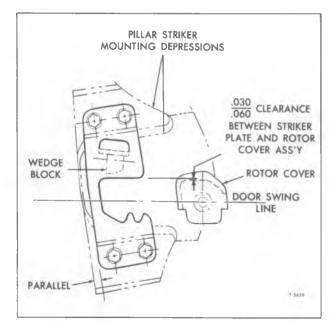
Lock Rotor Cover Assembly and Striker Plate
